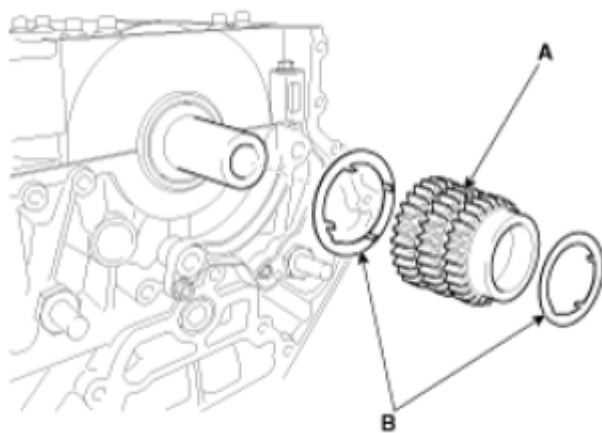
Identifying Crankshaft Sprocket And Friction Plates
